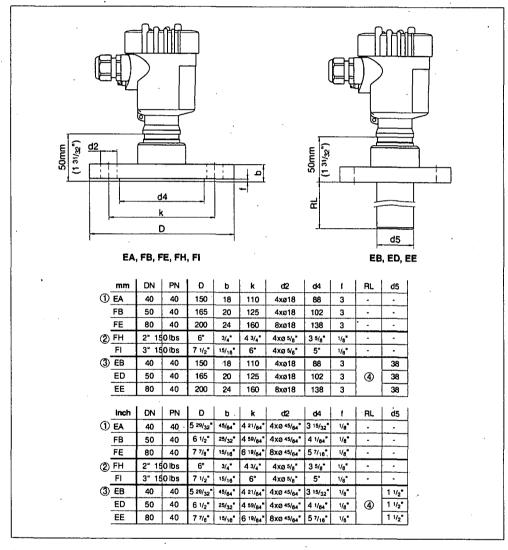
VEGABAR 64, flange connection 1 Flange connection acc. to DIN 2501 2 Flange fitting acc. to ANSI B16.5
